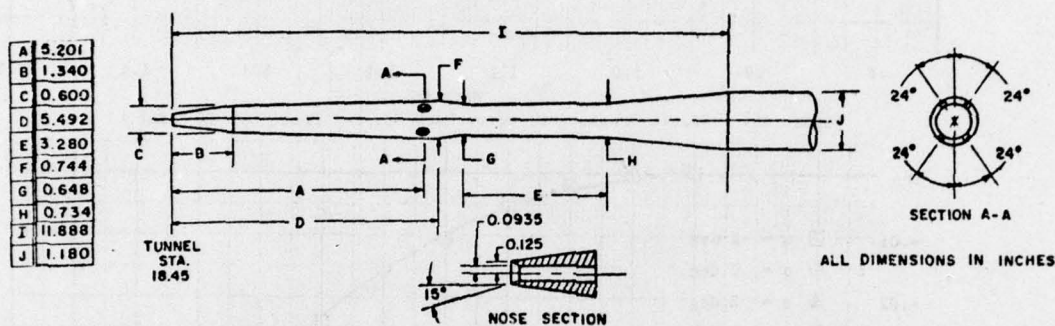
Pitot Probe Details and Dimensions for Probe 855 CK (Ref. 2)
